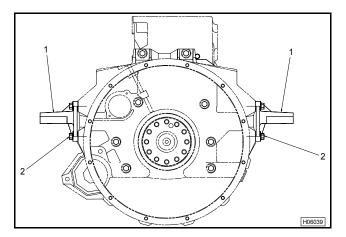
Loosening engine mounting bolts (148-tooth ring gear only)
